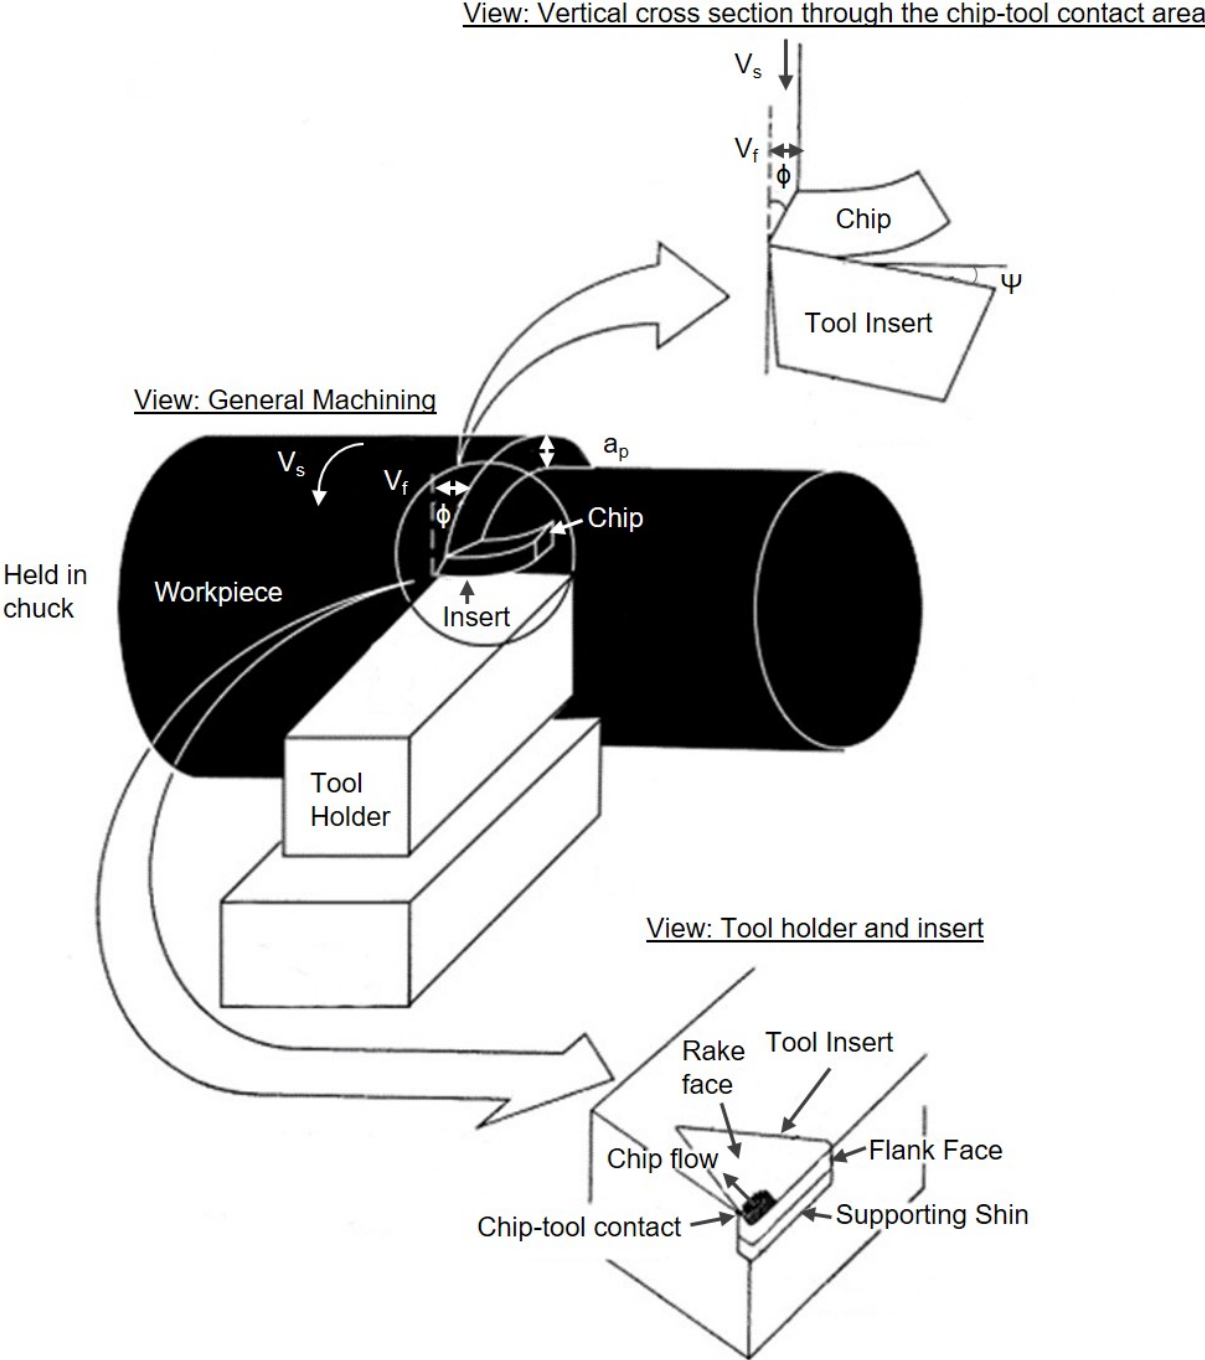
Diagram showing the turning process on a lathe. Top right shows a magnified view of the chip, tool and work material contact. Bottom right shows details about the insert. This figure is adapted from [39].
